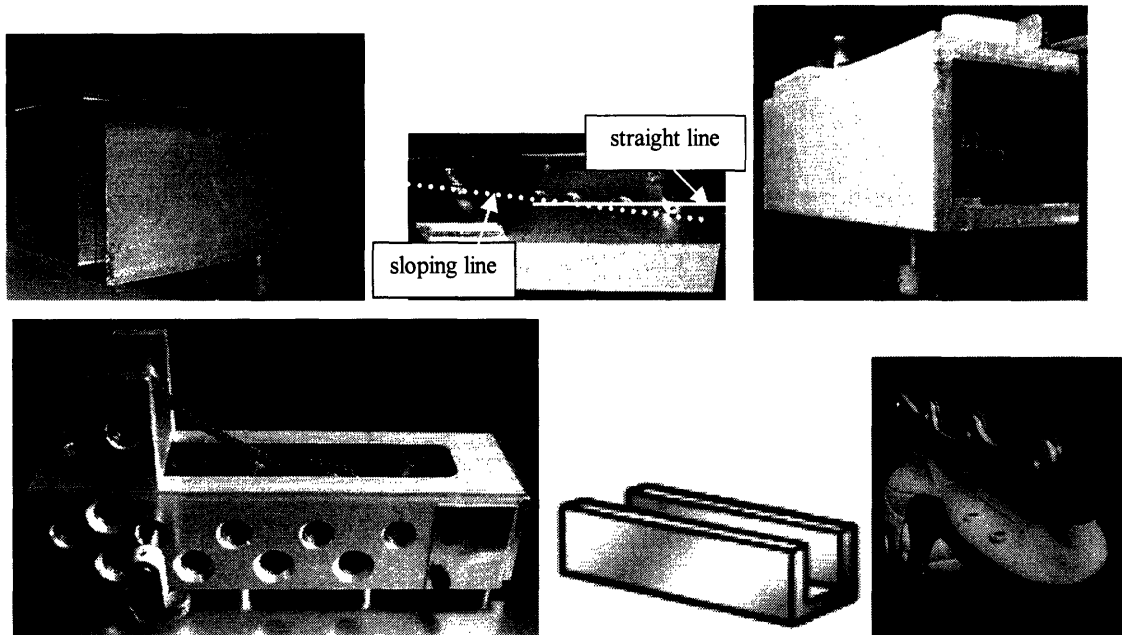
(Top left) Chassis, gear drive, front, showing reinforced area for pedal load application. (Top center) Side view of gear drive with fastened reinforced pedal area and axle lines. (Top left) Rear view of chassis showing 2" x 2" square aluminum channel used in construction. (Bottom left) Chain drive chassis showing lightening holes inserted to reduce mass. (Bottom center) 2"x2" Aluminum U-channel (McMaster.com accessed on 9/4/05). (Bottom left) Inverted inline skate showing chassis.
